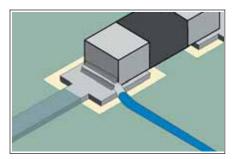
Acceptable Wire soldered to pad, parallel or perpendicular to component.
